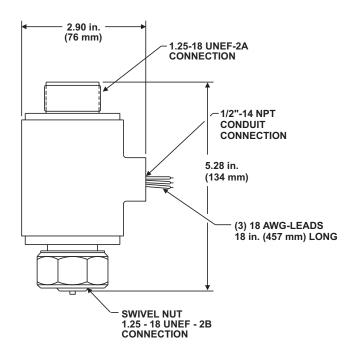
Installation of Electric Control Head (Stackable Type), P/N 486500-01
